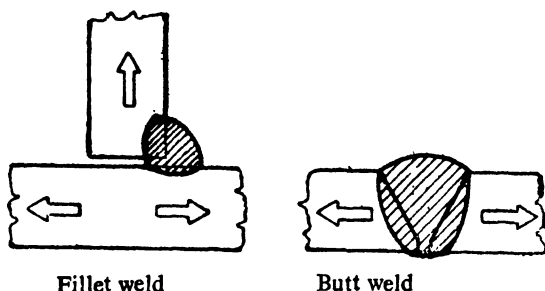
·6. Heat paths in fillet and butt welds.
